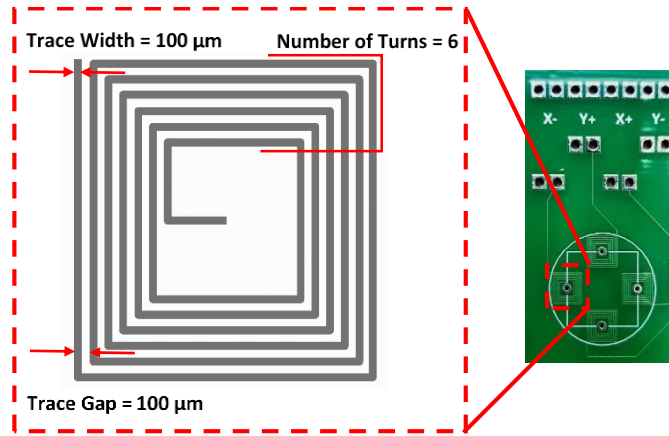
3 Manufactured PCB (top side) and detailed schematics
